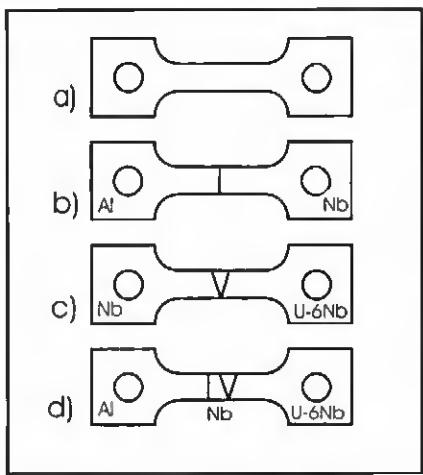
Schematic drawing of different tensile bar configurations. The vertical lines indicate the explosive bond and the V-shaped lines indicate the electron beam weld. A — A base metal sample; B — an explosive weld sample; C — an electron beam weld sample; D — explosive and electron beam weld sample.
